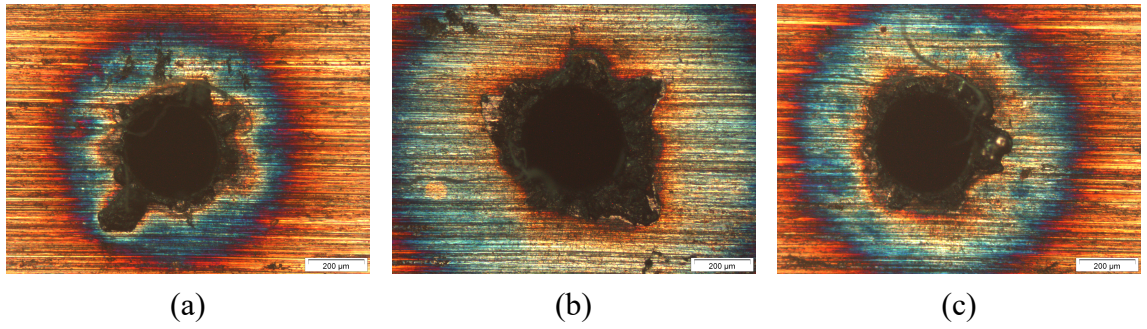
Holes bottom surfaces of 1000 μm SS304 sheet
